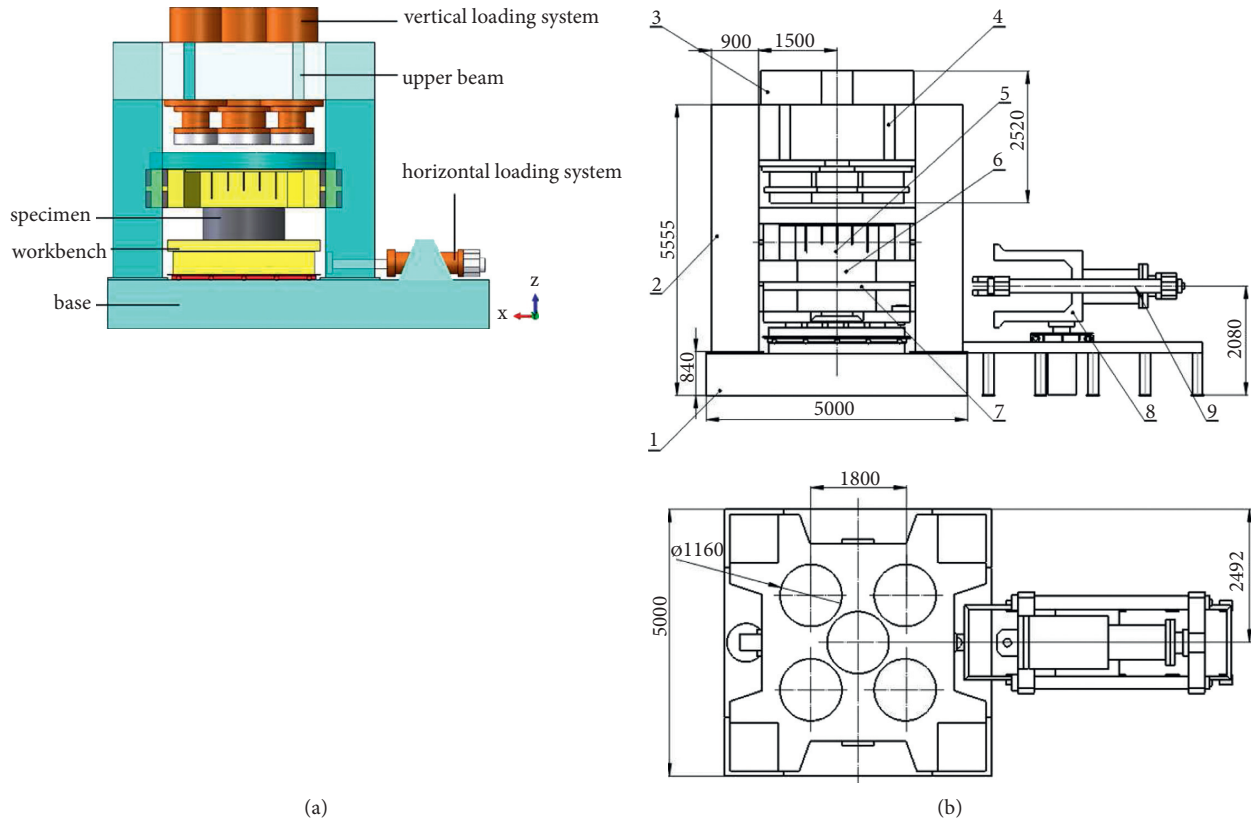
Structure drawing and technical drawing of 6000t compression-shear test machine. (a) Overall layout of 6000t compression-shear test machine. (b) Technical drawing of 6000t compression-shear test machine. (1) Base; (2) column; (3) hydraulic cylinder; (4) upper beam; (5) upper platen; (6) specimen; (7) cylinder; (8) double shear plates.
